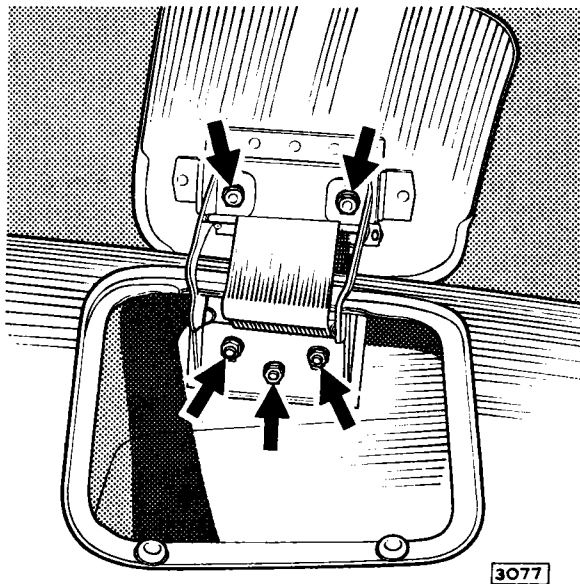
Removal of the fuel filler lid (R.H.)
